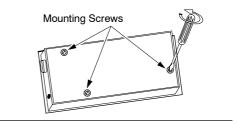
Removing the Mounting Screws of the TD 200C and TD 200
